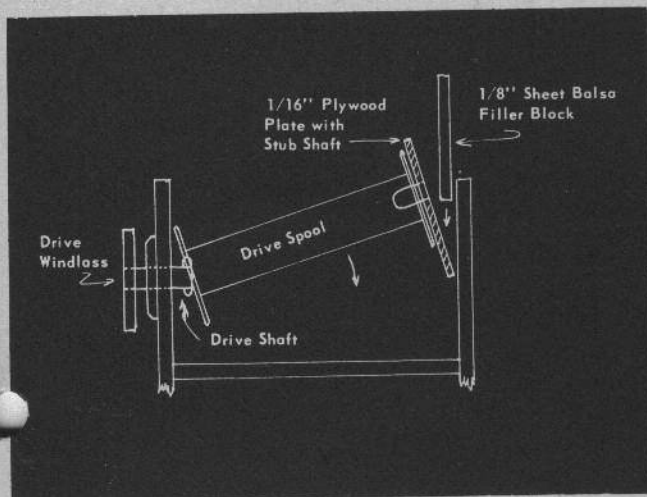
Drive spool engaged on drive shaft, ply plate with stub shaft, upper end. Spacer block lowered to help engage the spool.
